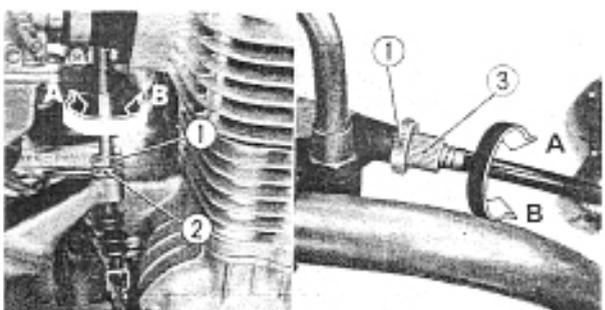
① Lock nut ② Clutch cable lower adjuster ③ Clutch cable upper adjuster
